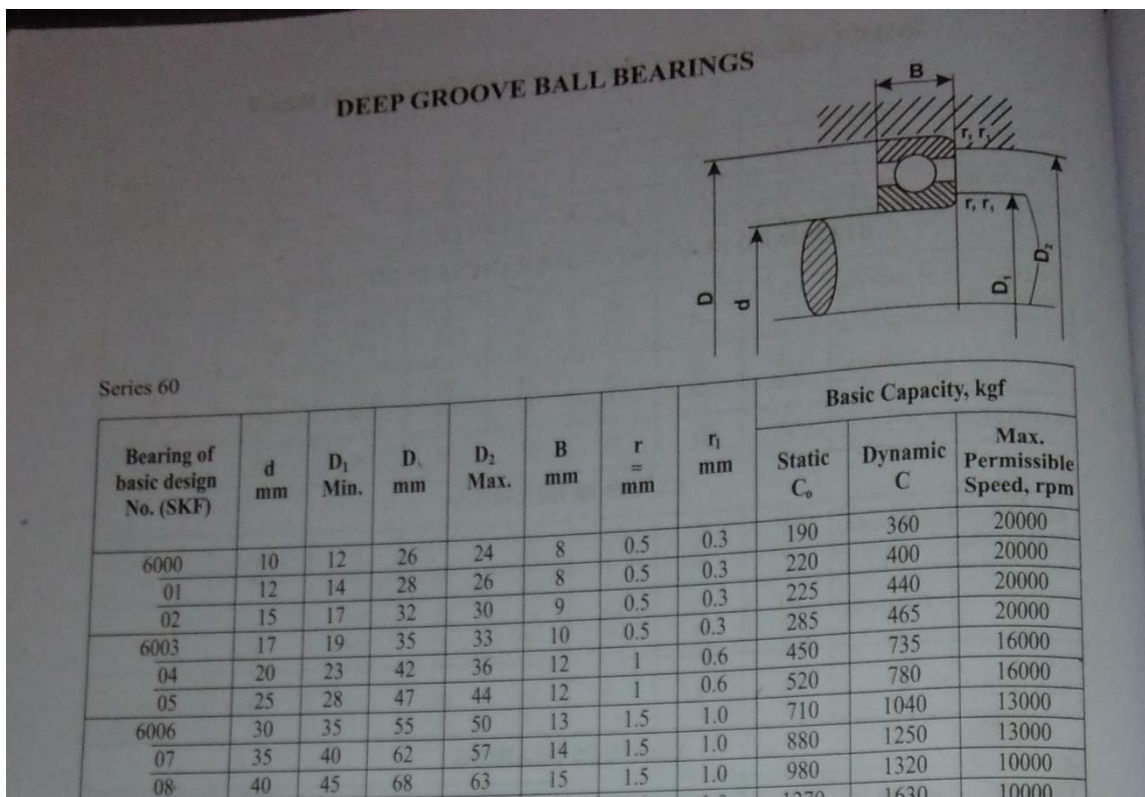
Selected bearing from PSG (SKF 6004)
